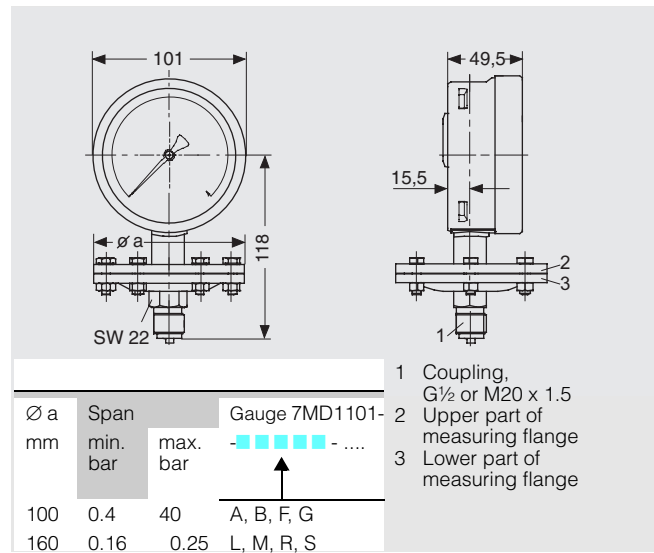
/152 Pressure gauge without supplementary equipment, measuring flange closed; dimensions
